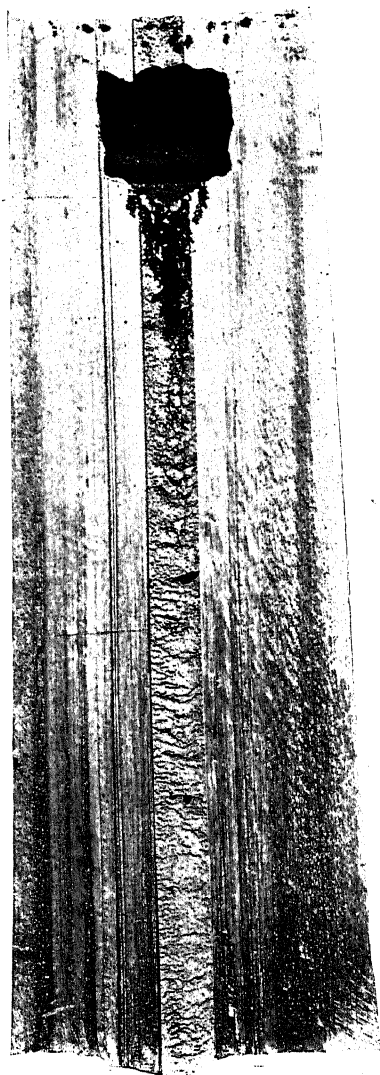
INGOT OF SAME SECTION AS FIG. 1, AND 53.5 IN. LONG, CONTAINING CAVITY OF 250 CUBIC INCHES.
